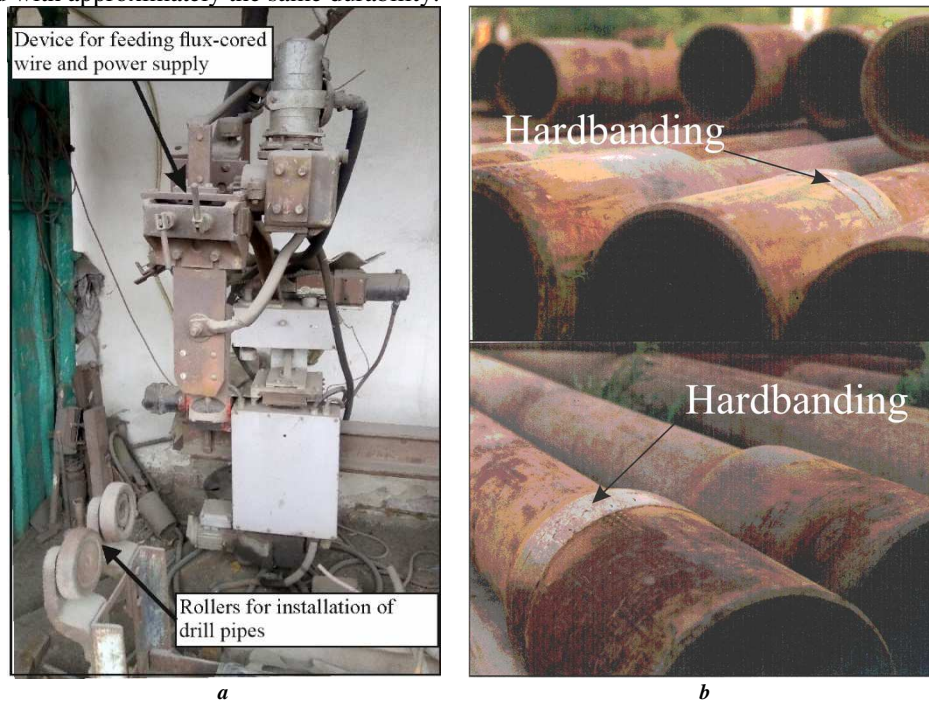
The general view of the hardbanding machine (a) and the recovered drill pipes (b)
